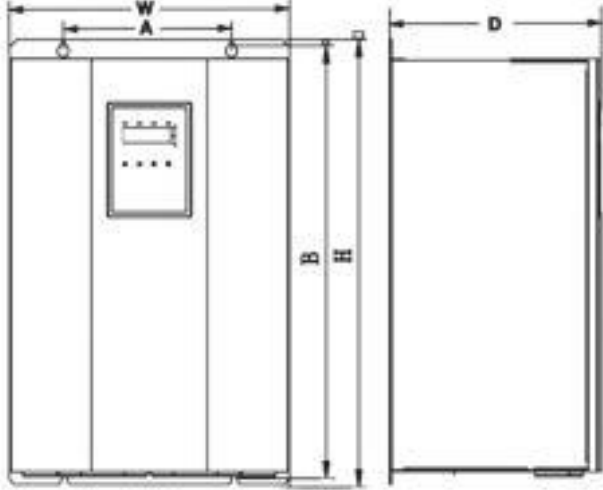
Dimensions (18.5 ~ 110kW) (400V)
